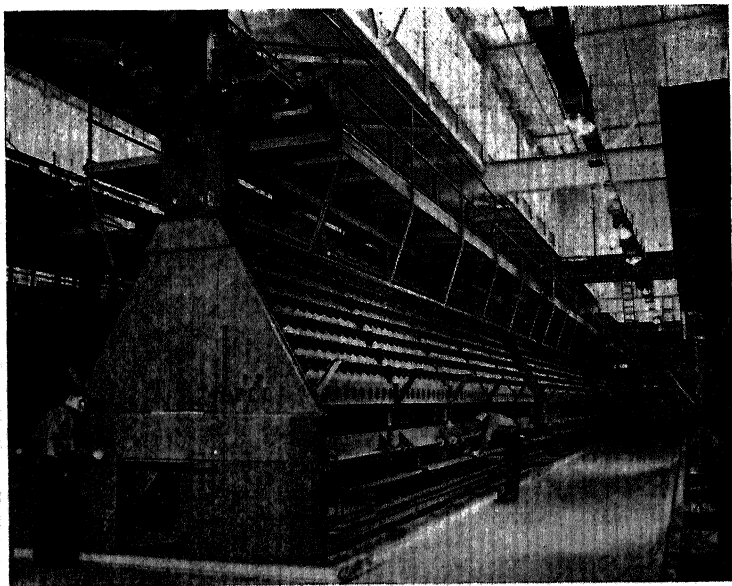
Arc welded construction of these continuous process rayon producing machines saved more than 67% over cast construction and made possible notable economies in performance.
